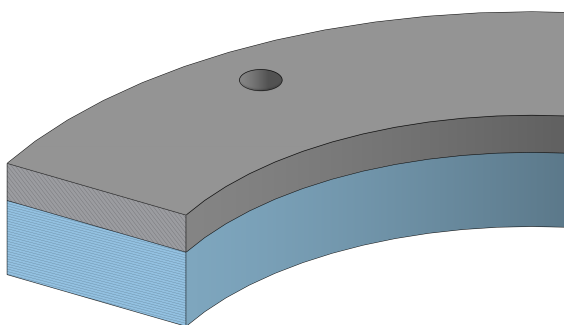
Cross-sectional view of Gen 0 (initial fixture).
